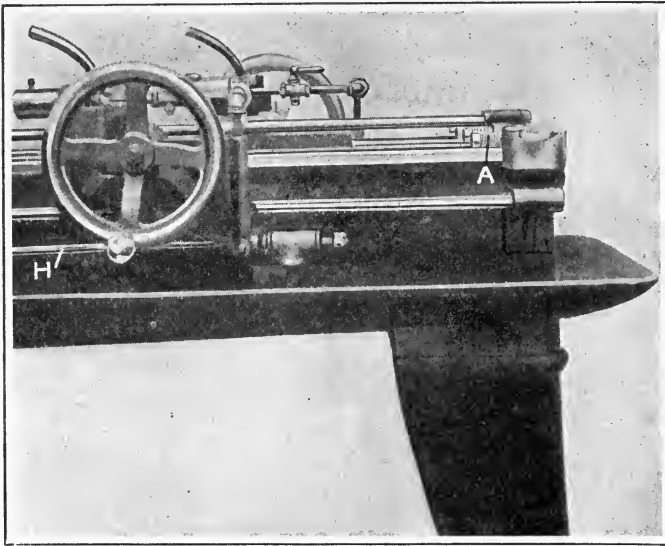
End View of Machine, showing Tailstock Buffer Springs
